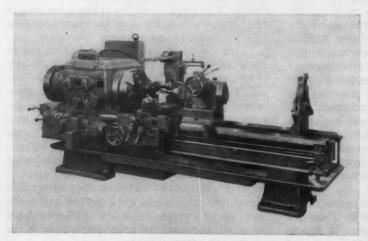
Hollow-spindle "Copymatic" lathe to be demonstrated
